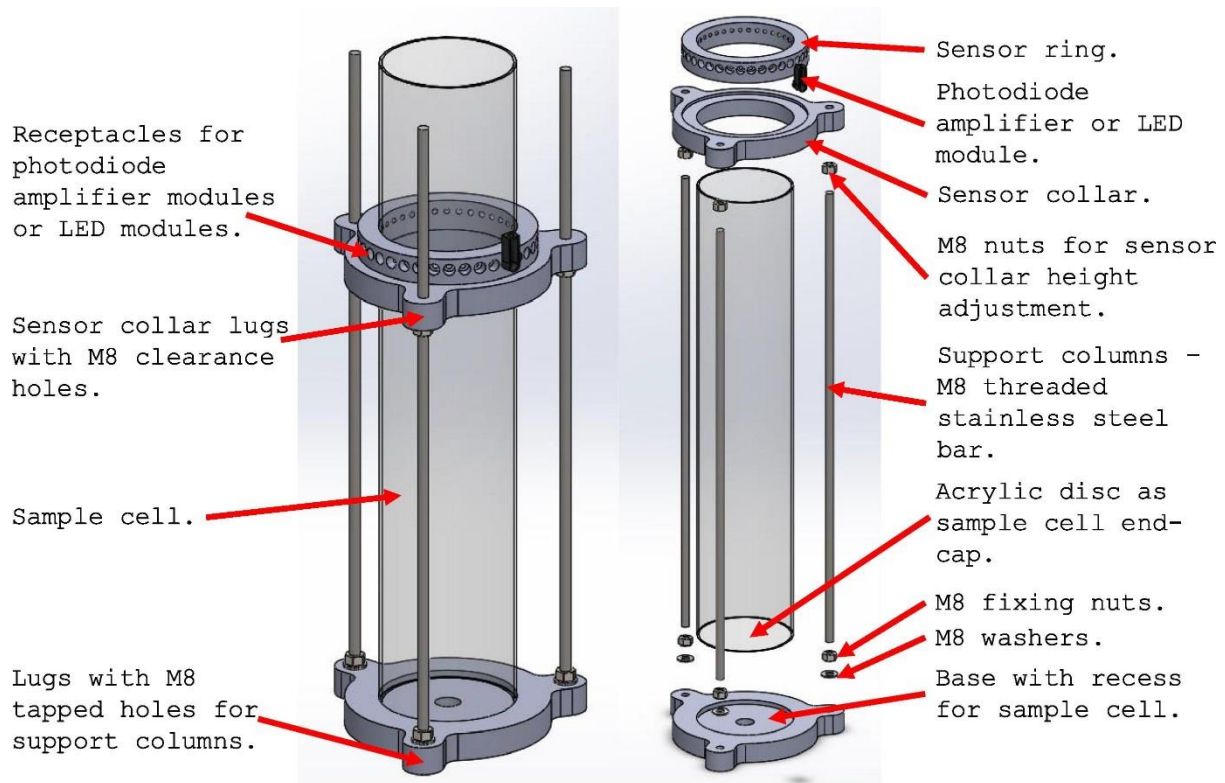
TARDIIS instrument assembly (left) and exploded view (right) showing the mounting system with support columns for the sensor collar containing the sensor ring.
